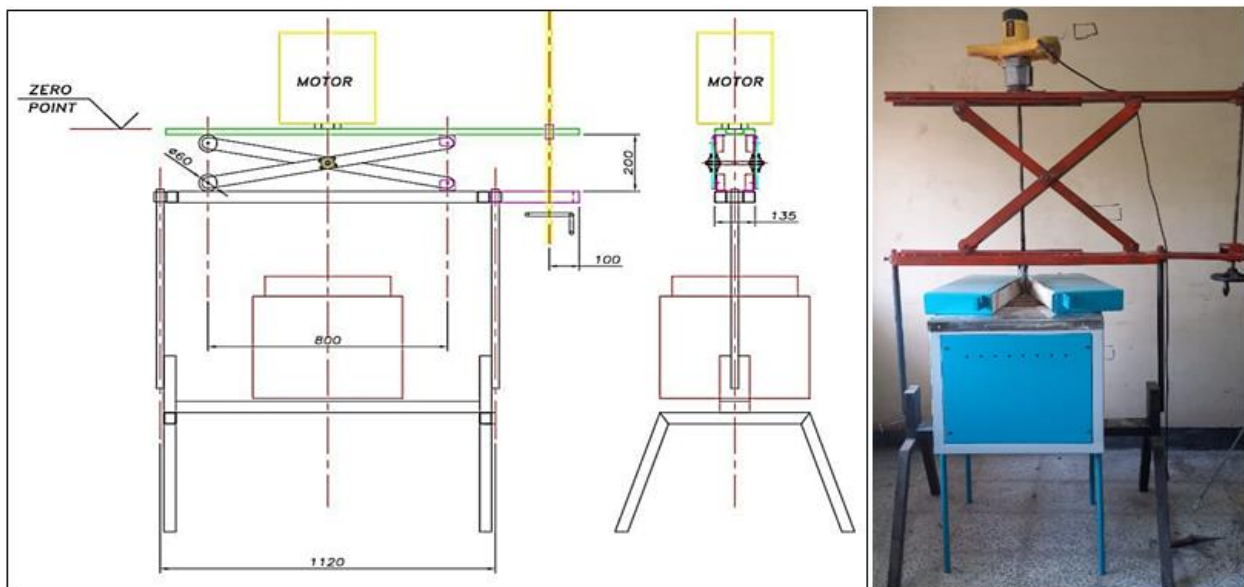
Design drawing a) Stir casting machine b) Machine setup
